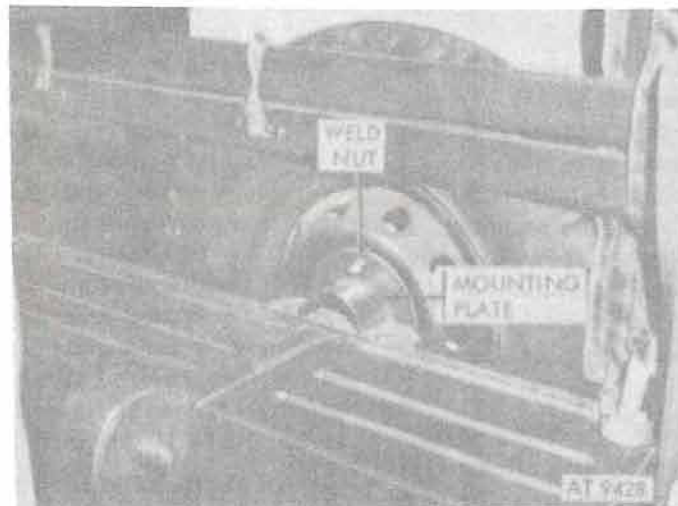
M718 and M718A1 ambulance spare wheel mounting bracket and wheel assembly.
